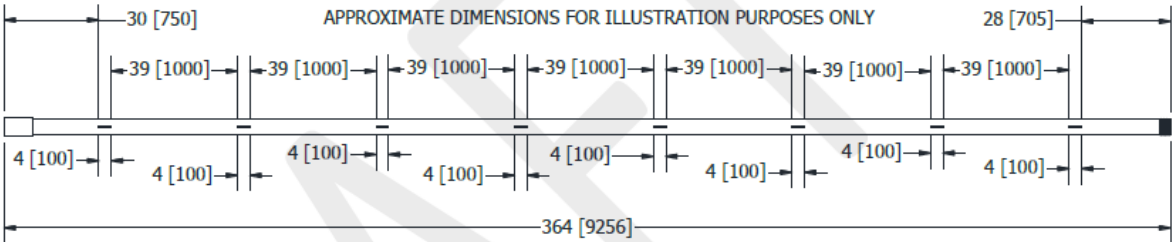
plasma cutting dimensions tubing upper part [13]
